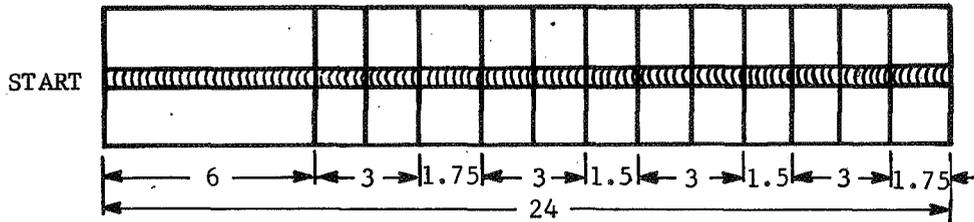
Transverse Welded Tensile Specimen Location on 0.063 and 0.112 Inch Test Panels
